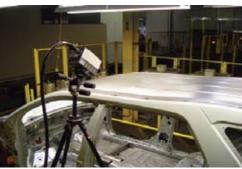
Set-up of an infrared imaging system for laser weld inspection at the Ford assembly line.
